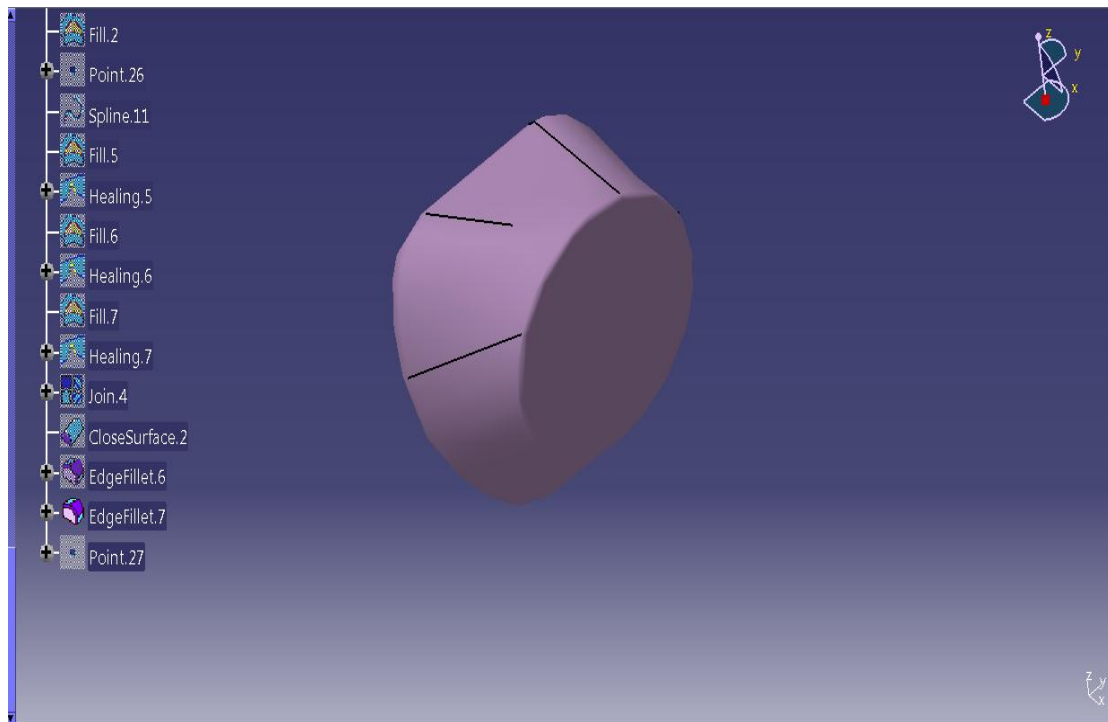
Handbrake's adjusting knob peripheral surfaces.
